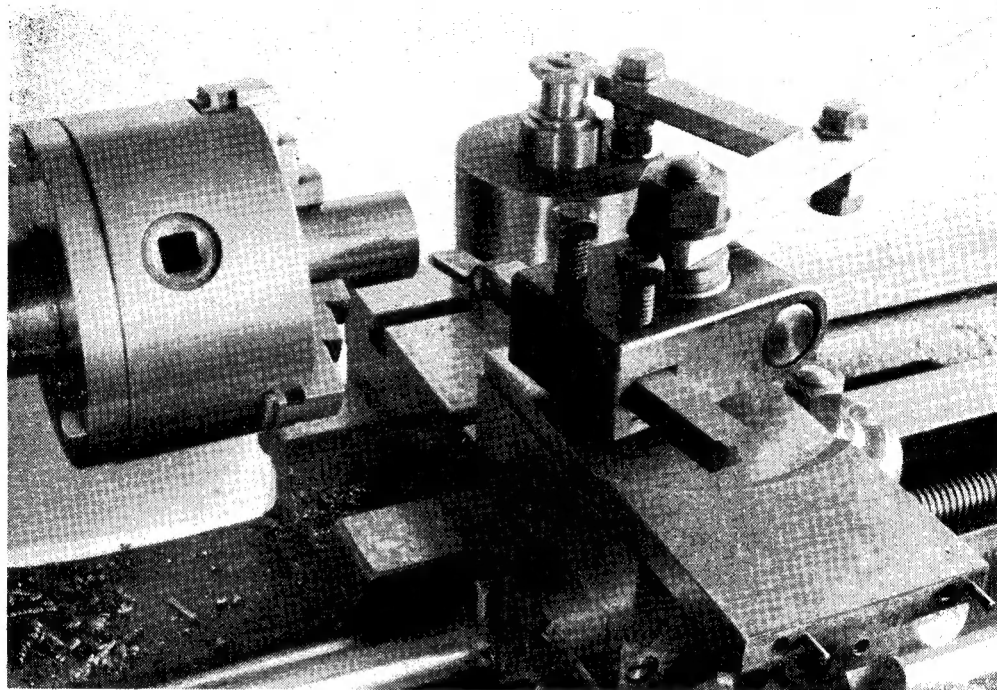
The shaping attachment adapted for machining the end of a shaft
